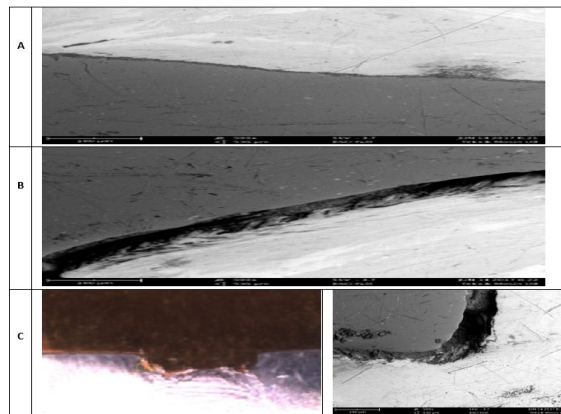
Macrostructure and SEM FSW Welding Results (A) length of pin probe 11.0 mm, (B) length of pin probe 11.5 mm, (C) length of pin probe 12.0 mm.
